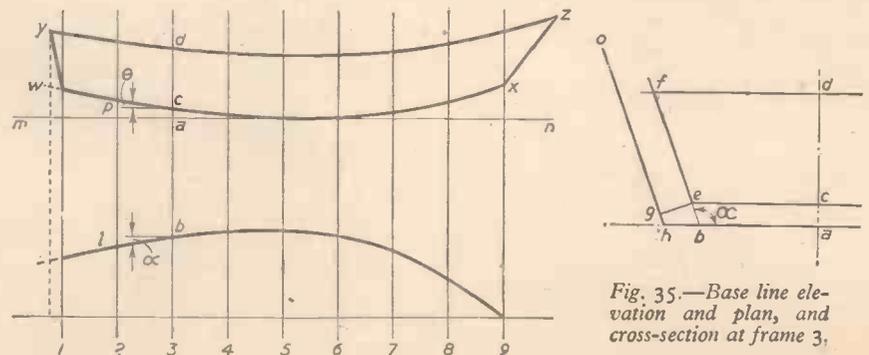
Base line elevation and plan, and cross-section at frame 3.
